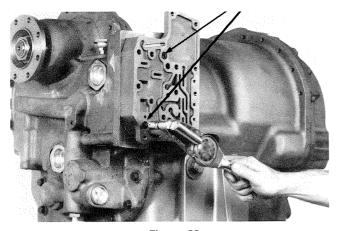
Install the two allen head  $3/8\ 16\ x\ 1\ 3/4$  screws. In the locations shown. Tighten to specified torque (see torque chart).
